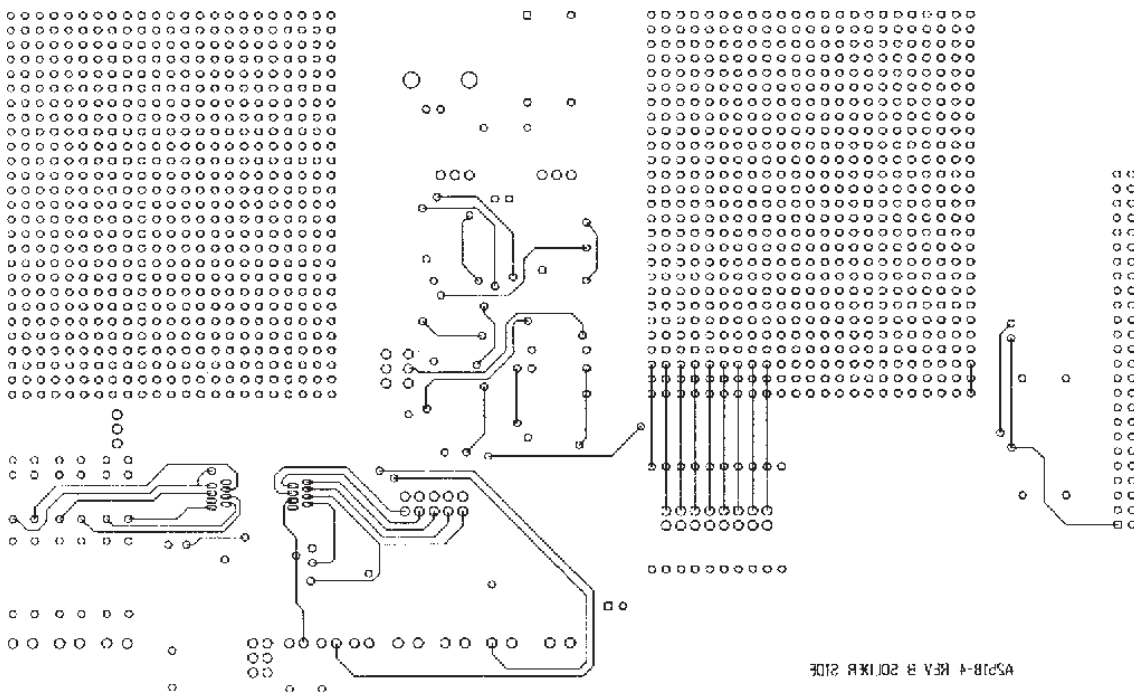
Solder Side of the DEM-ADS7843E/45E Demonstration Board.
